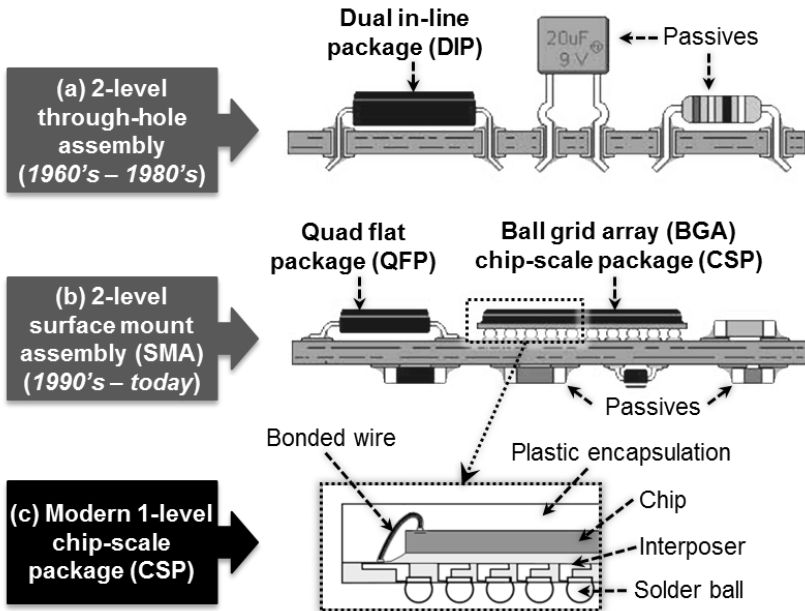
(a,b) Cross-sectional schematics of common 2-level packaging schemes (through-hole and surface mount assembly); and (c) cross-sectional schematic of a modern 1-level chip-scale package (adapted from: Tummala, 2001; Intel, 2000).
